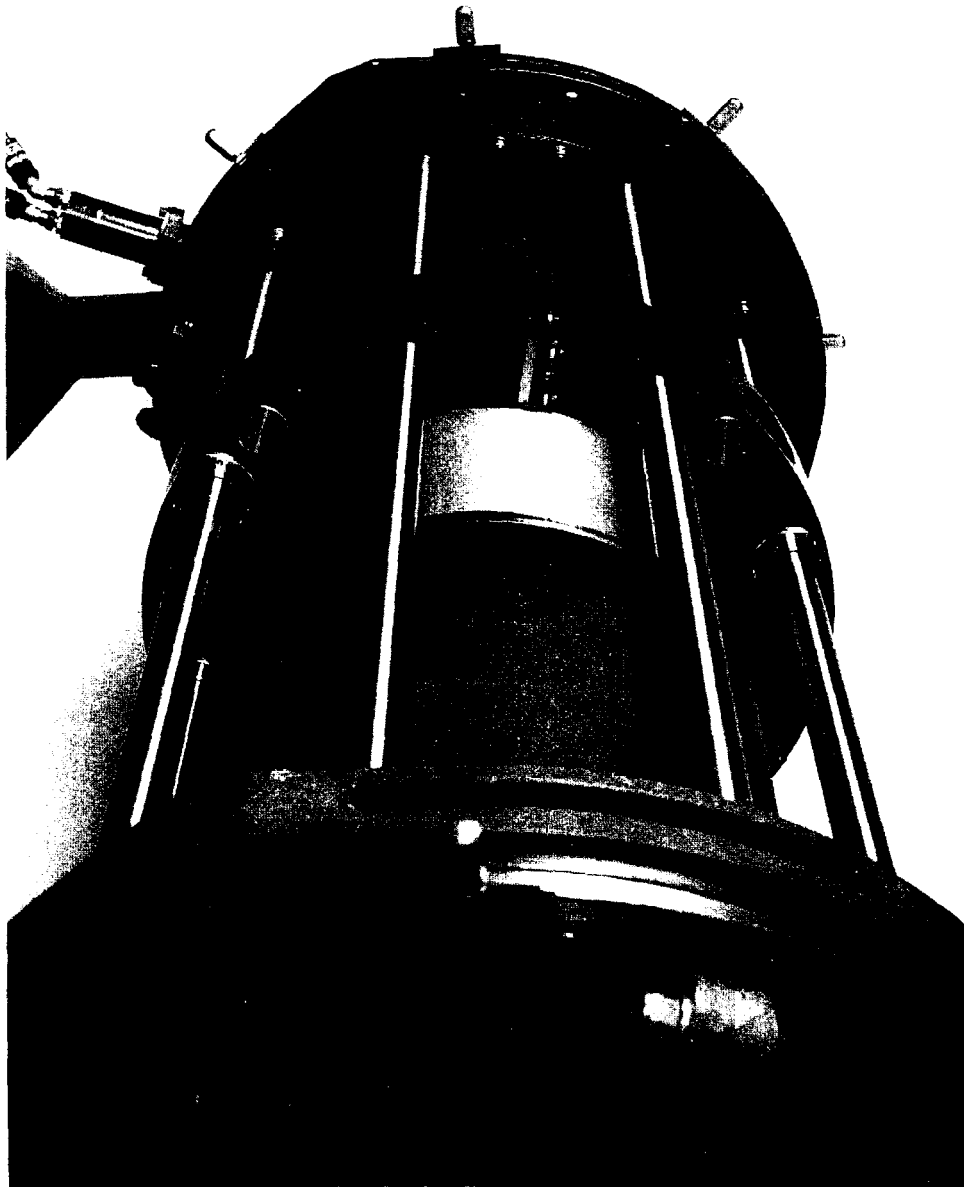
TOOL FOR IN SITU MACHINING OF PROPELLER SHAFT JOURNALS
